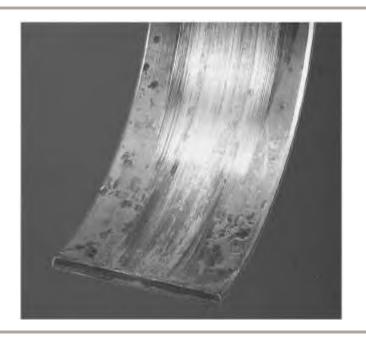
02142813Scuffed rod bearing with more severe damage as a result of lack of lubrication.
